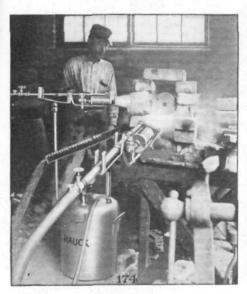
Hauck Welded Steel Kerosene Torch No. 14 brazing patch on pipe coils.
